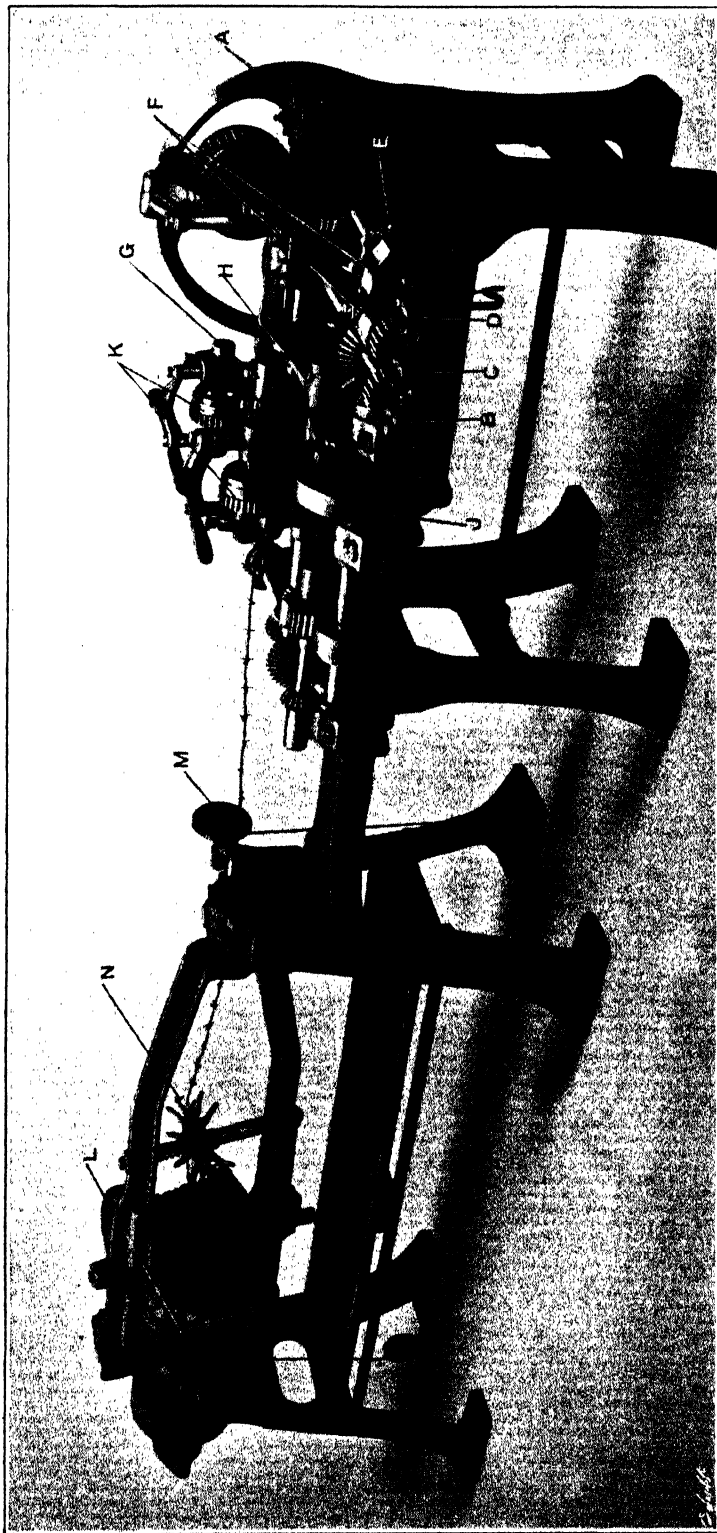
BARBED WIRE MACHINE—J. HETHERINGTON AND SONS.
